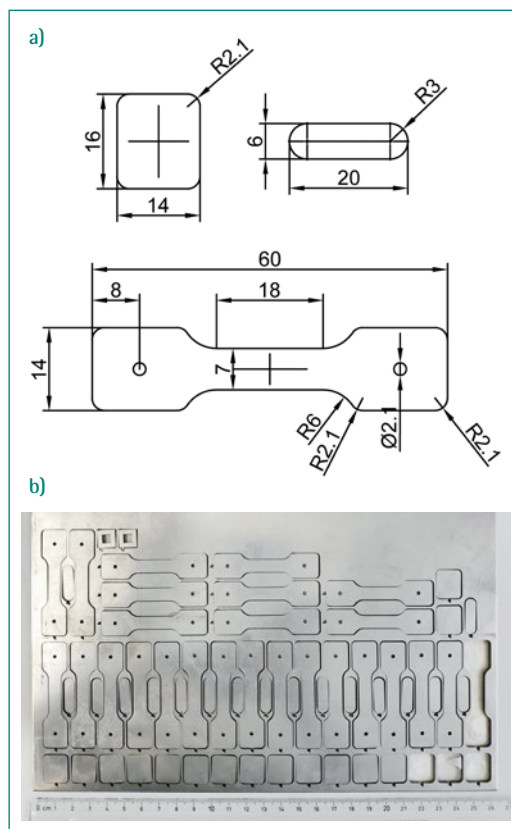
Technical drawings of the mechanical specimens (a) and samples produced by waterjet cutting (b).
